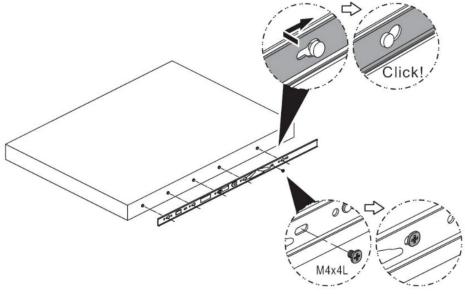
MOUNTING BOXILLA STEP 2
